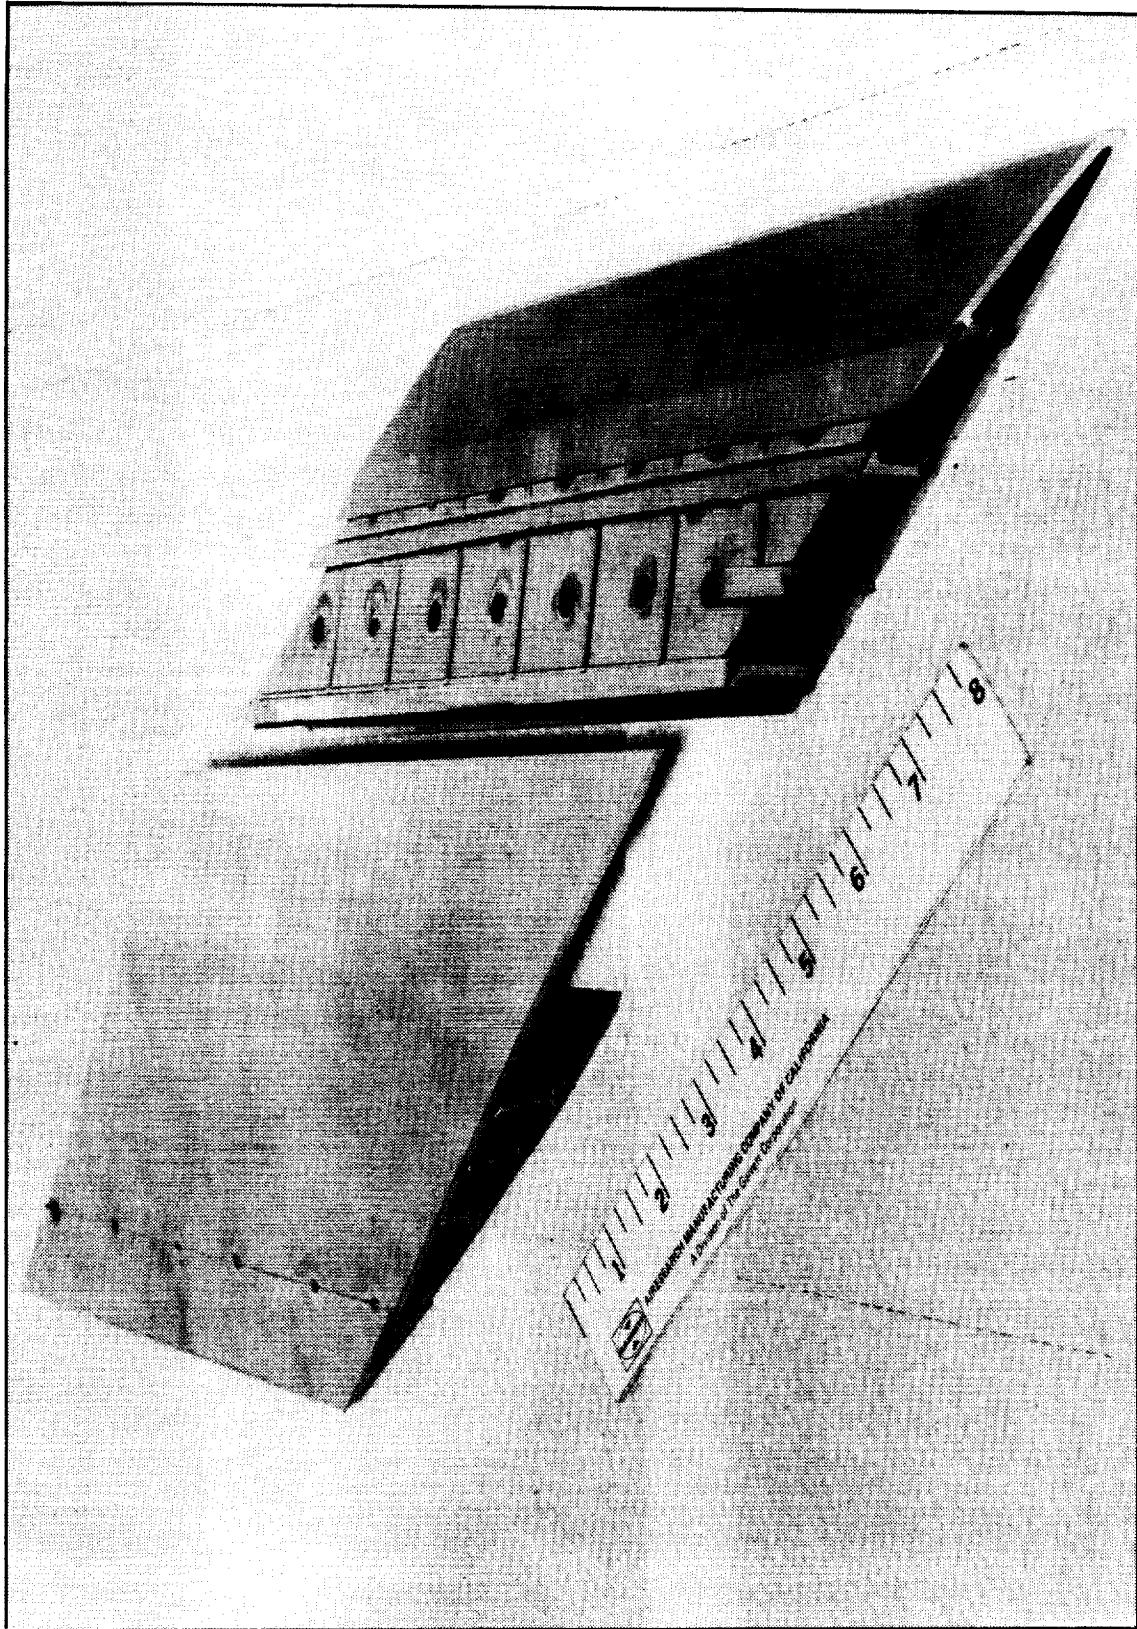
Assembled Forward and Aft Partial-Length Strut Details Prior to Braze
